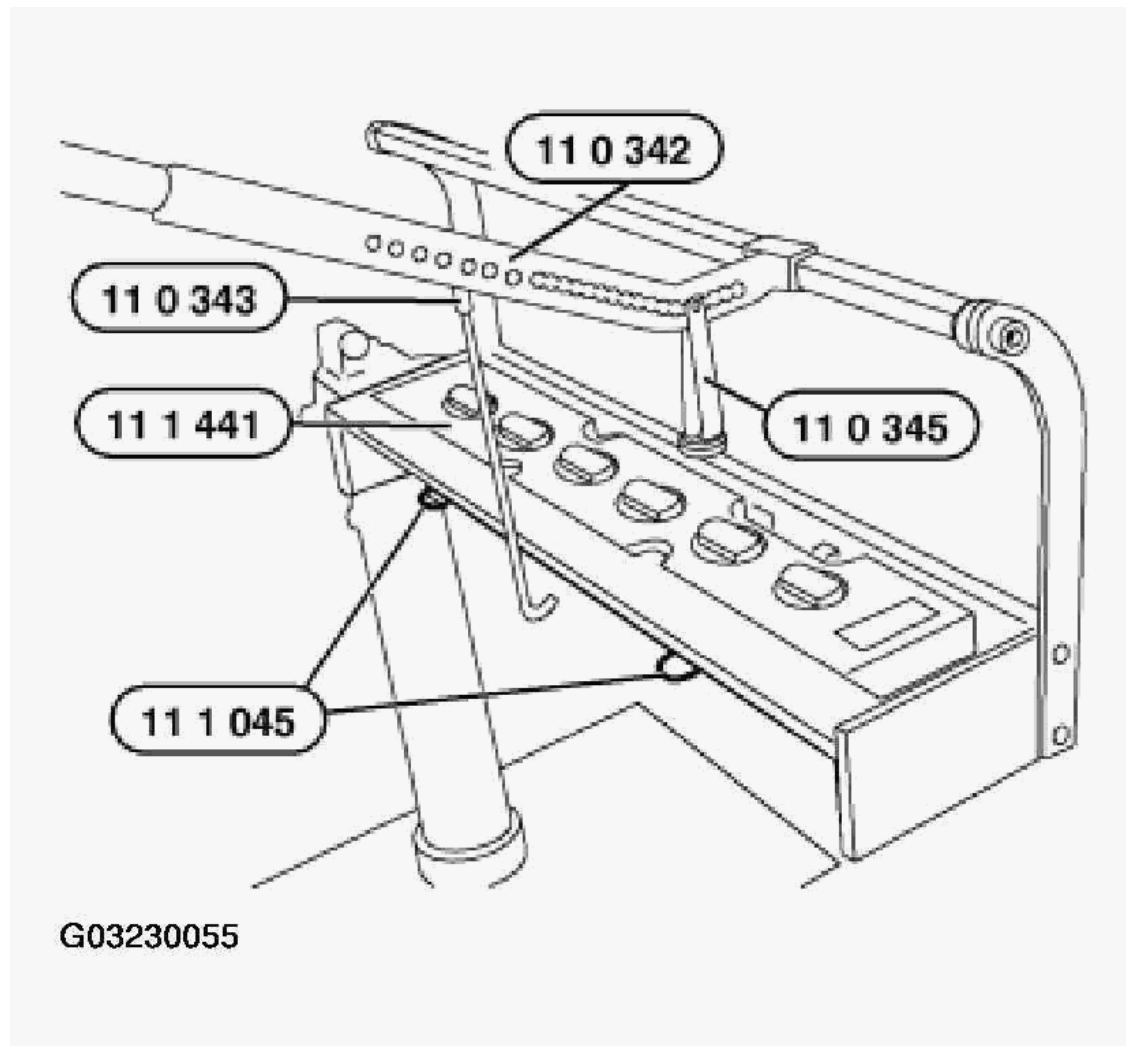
Identifying Special Tools 11 0 340 Accessories
